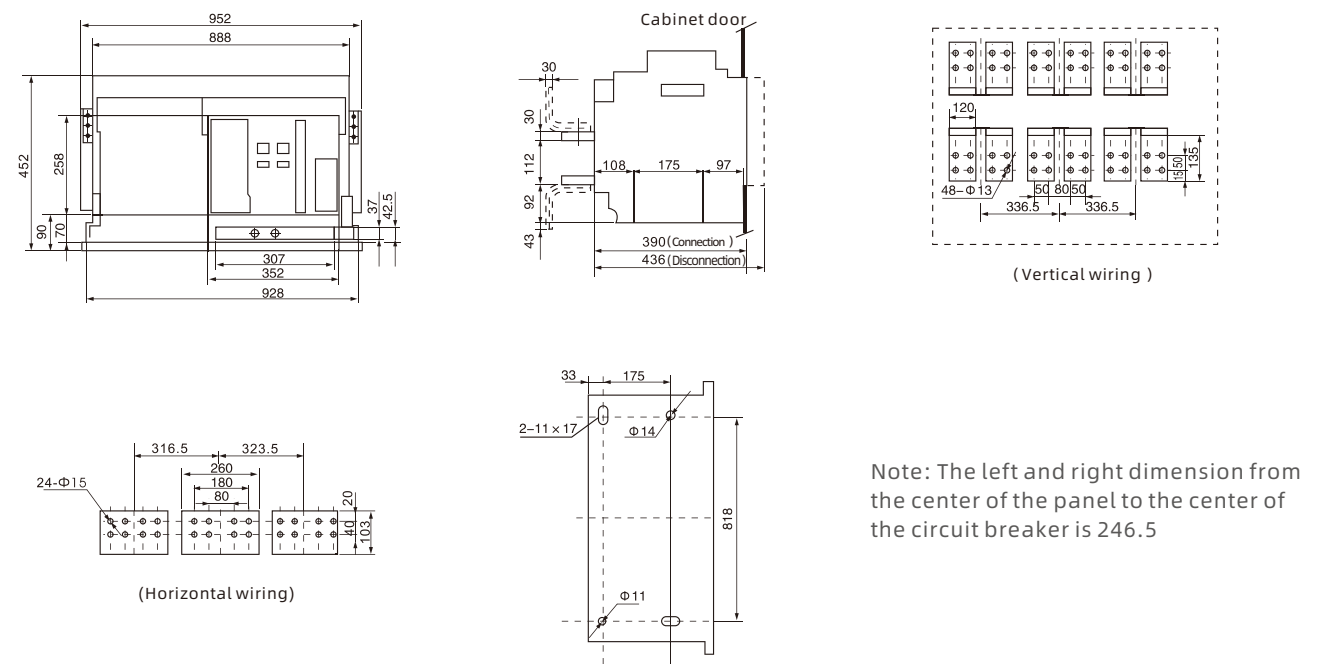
Draw-out circuit breaker overall and installation dimensions (ARW1-6300 In=6300A)
